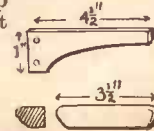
The top detail is of the brackets supporting the bottom; the lower one shows how the caps are shaped.
